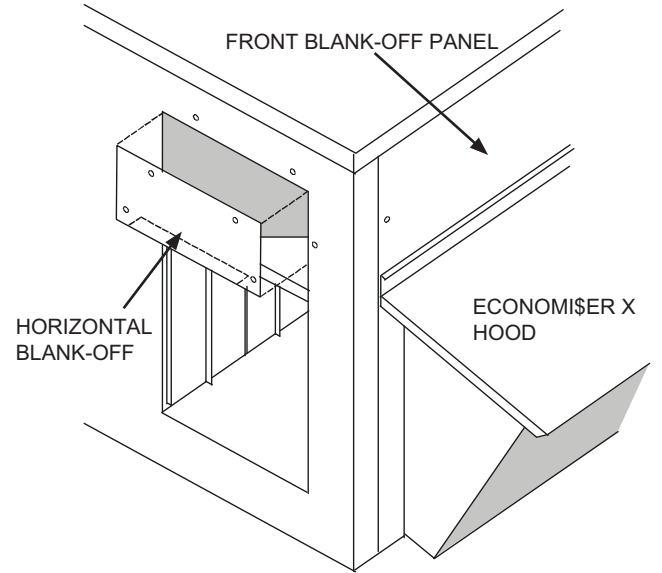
Horizontal Return Opening Blank-Off Panel
